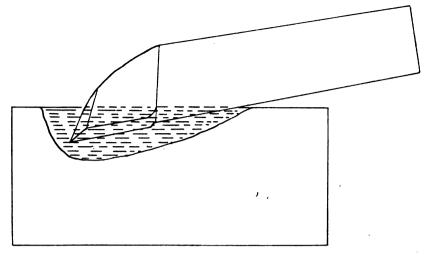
THE CORRECT METHOD OF DIPPING A SIDE TOOL
